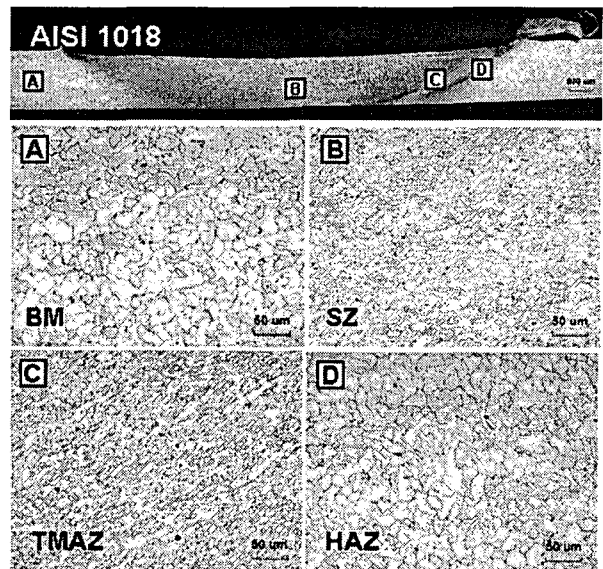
Transverse section of FS weld in AISI 1018 steel
